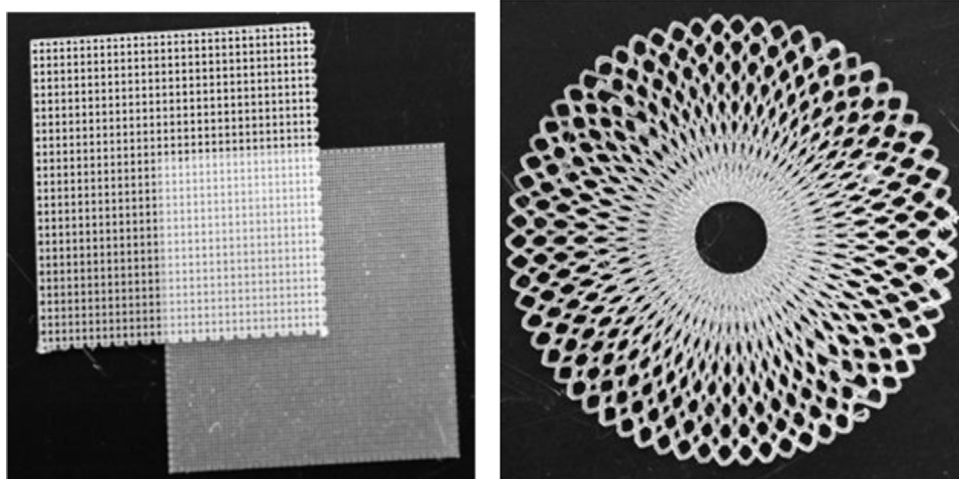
Examples of AM pads produced using the SE1700 resin.
